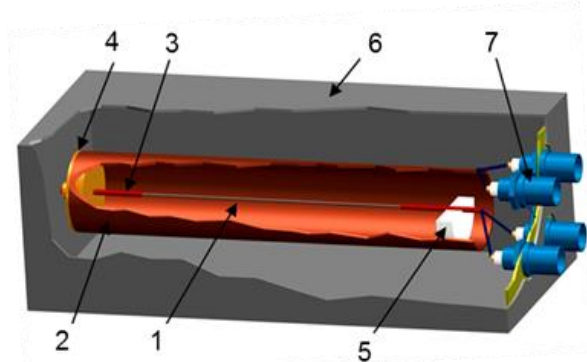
Coaxial resistor design (1 – resistance wire, 2 – outer tube, 3 – supporting tube, 4 – shorting plate, 5 – PTFE support, 6 – shielding box, 7 – connectors) [6]
